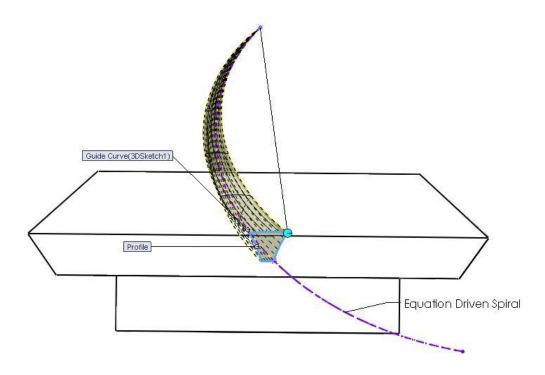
Lofted Cut of Spiral Gear Tooth Shape
